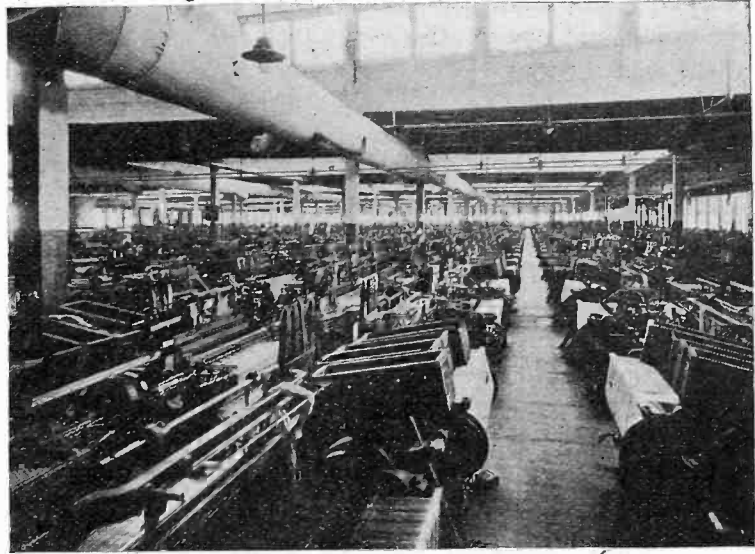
INTERIOR OF WEAVE SHED. HOT AIR DISTRIBUTING PIPES SHOWN OVERHEAD
